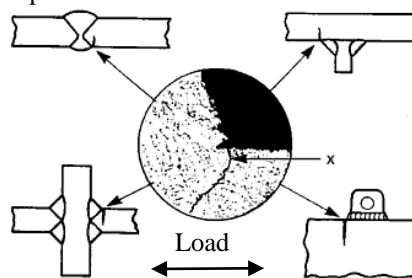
Fatigue cracks initiated by defects characteristic for toes of seam welds, taken from [10].
